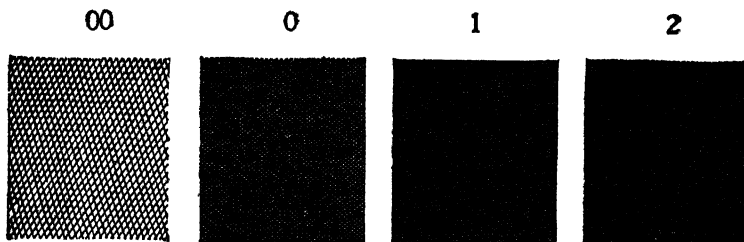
Nos. 00, 0, 1, and 2 cuts for machine files (exact size of cut).
